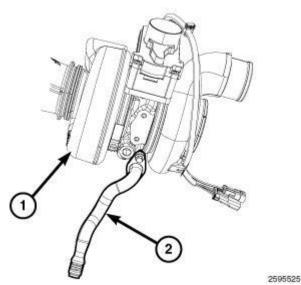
Turbocharger & Drain Tube Courtesy of CHRYSLER GROUP, LLC
